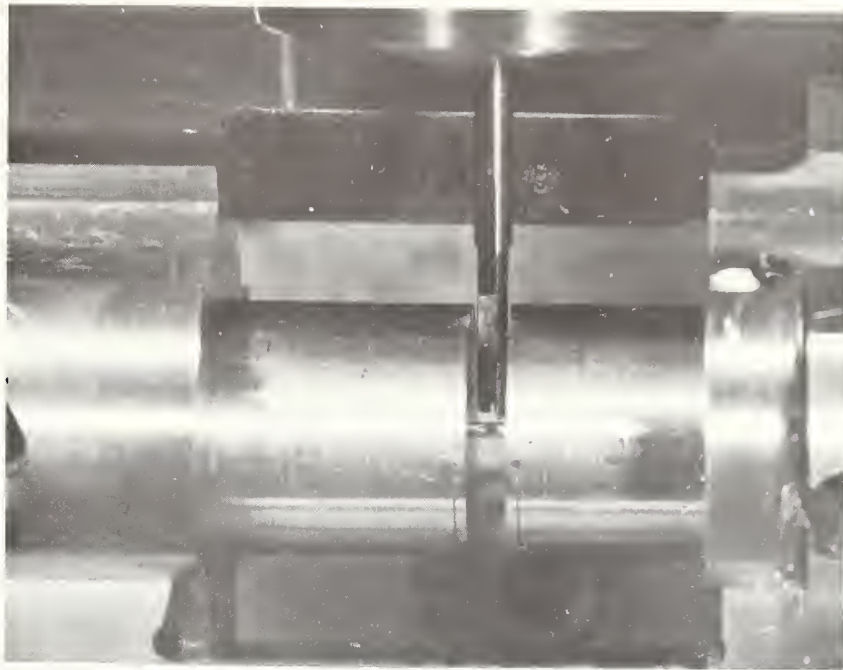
The specimen being machined. One of the four ribs connecting the two halves of the jig has been removed and the end mill is being positioned for a final passing cut.
